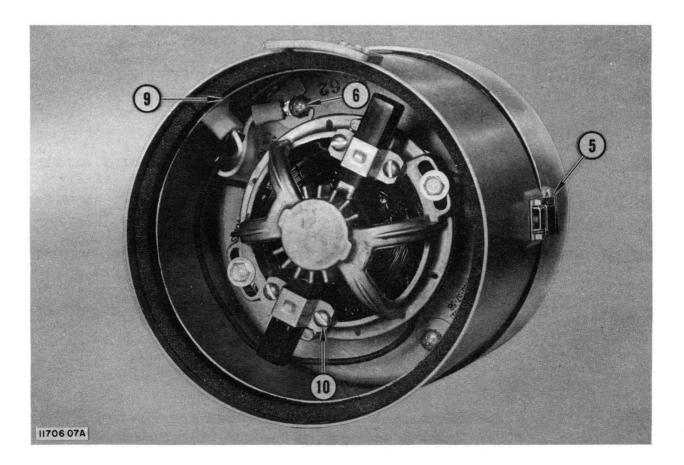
Removing Vacuum Unit Motor and Brushes
